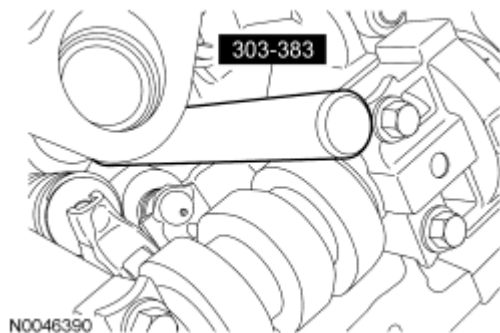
Installing Valve Seal Using Special Tool (303-383)
